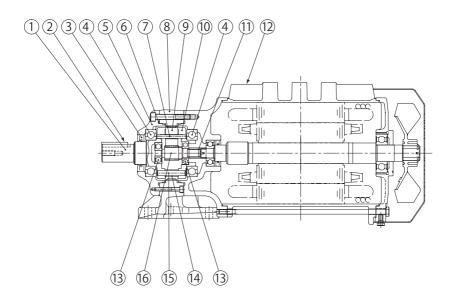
Type PNHM, Pin punch Gear Mechanism (Ex., Frame Size 5083)
